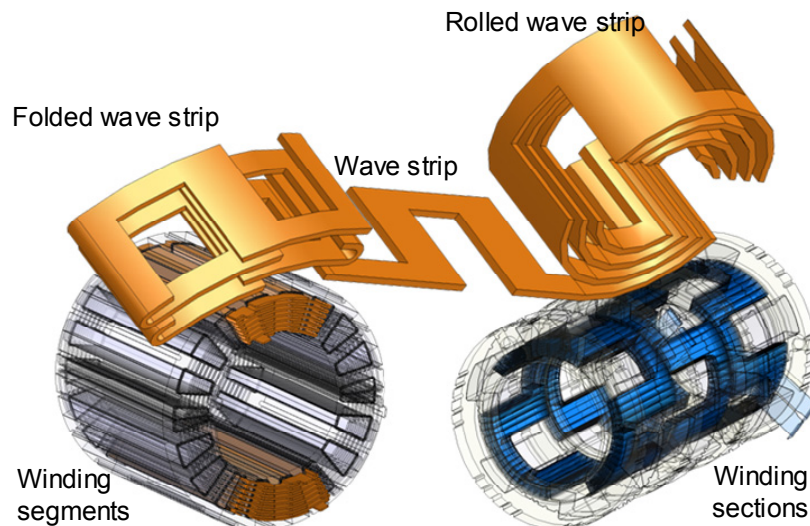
Formation of laminated windings from a wave-shaped conducting strip and the corresponding electrical machines with whole-length angular winding segments (left) and whole-perimeter axial winding sections (right).
